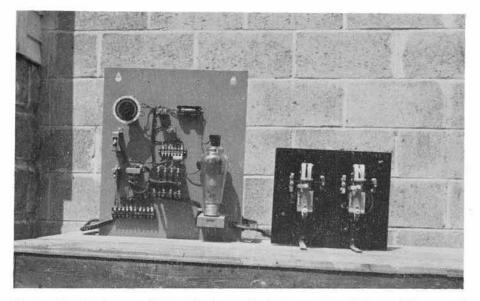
Equipment for producing pulsating current: (left) welding panel used to produce a rapid cycle; (right) contactor panel used to produce a slow cycle.
